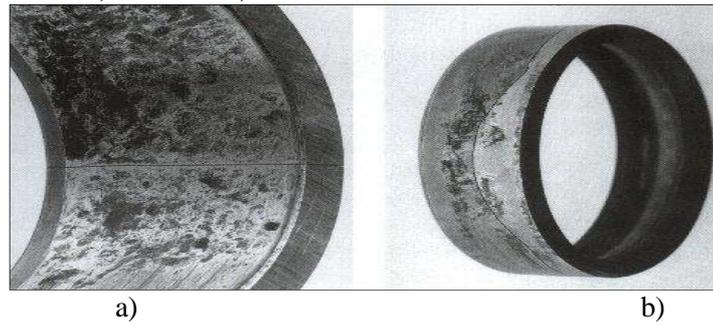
a) The fretting corrosion has caused the cracking of spherical roller bearing inner ring; b) fretting corrosion has caused longitudinal crack in a deep groove ball bearing outer ring.
